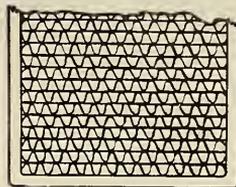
CORRUGATED AND PLAIN STRIPS ASSEMBLED
